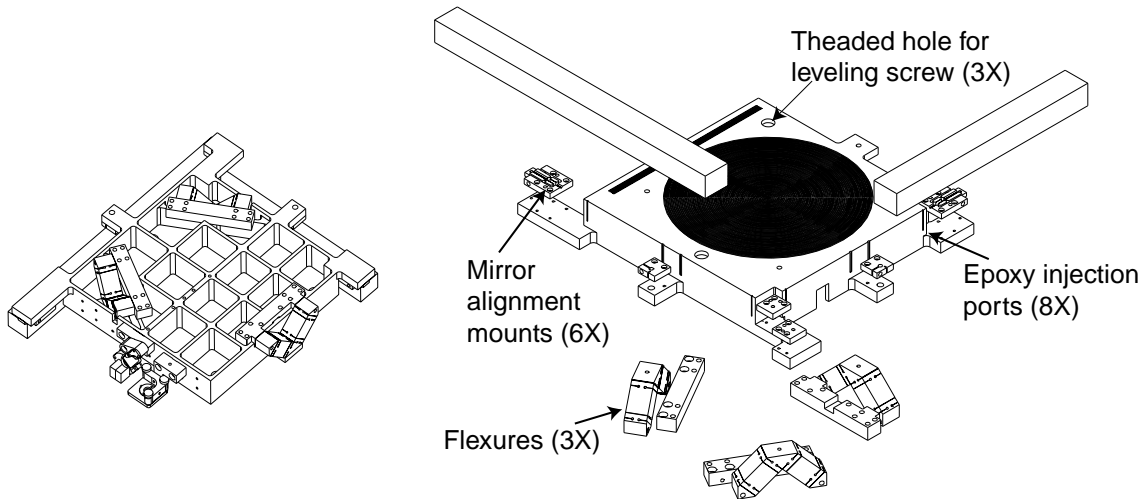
SBIL chuck assembly showing alignment and bonding features.
